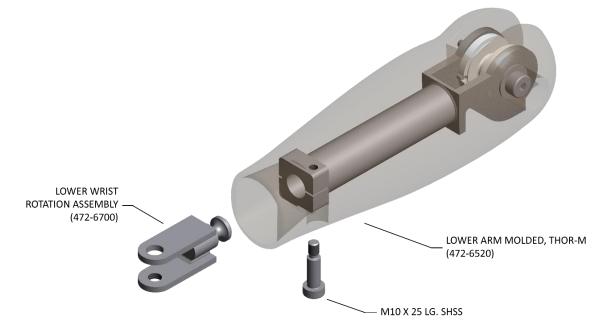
Lower Wrist Rotation Assembly Attached to Lower Arm Molded with M10x25 SHSS
